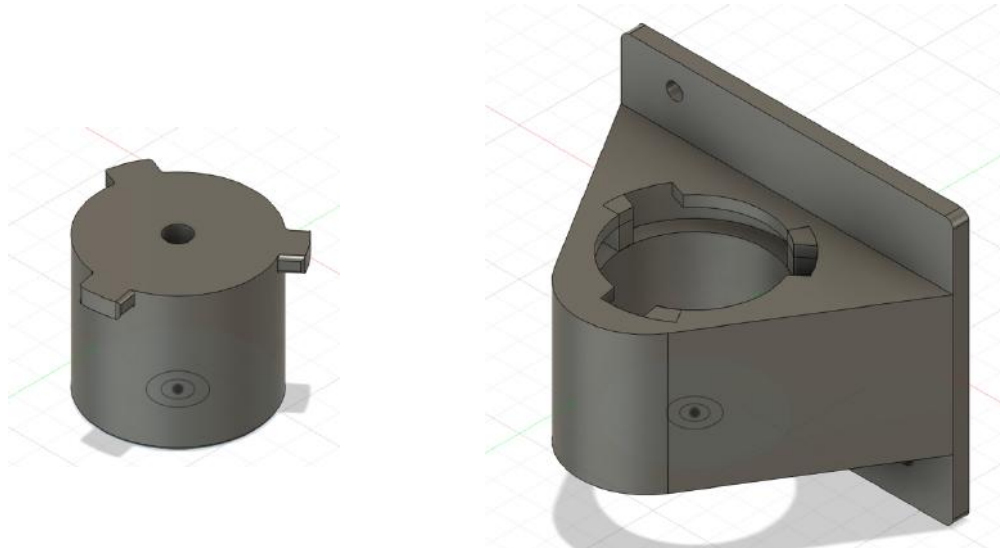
Holder design for the Electromagnet tool head shown in Figure 11.
